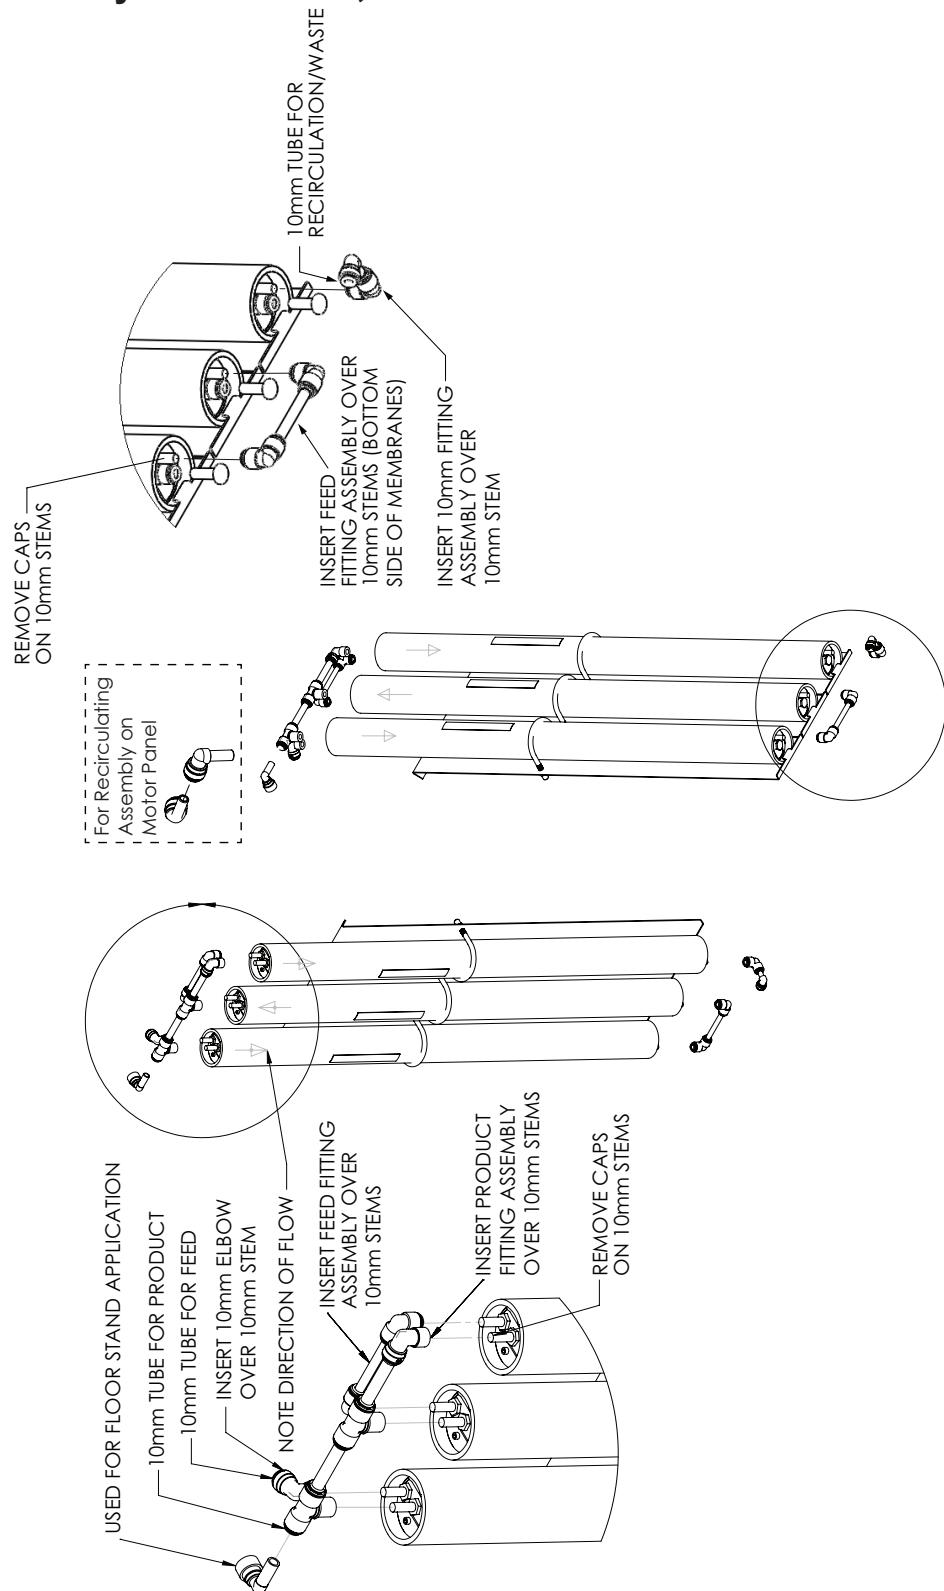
RO 3S/3L tubing assembly instructions, 230V.
